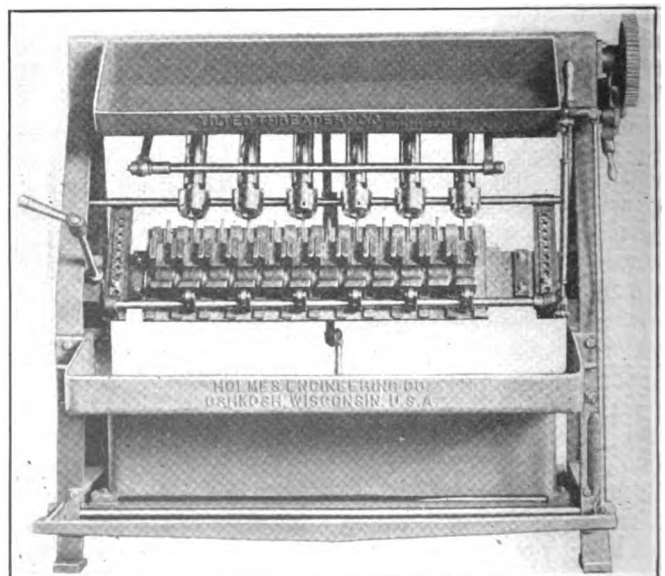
HOLMES MACHINE FOR EXTERNAL THREADING
